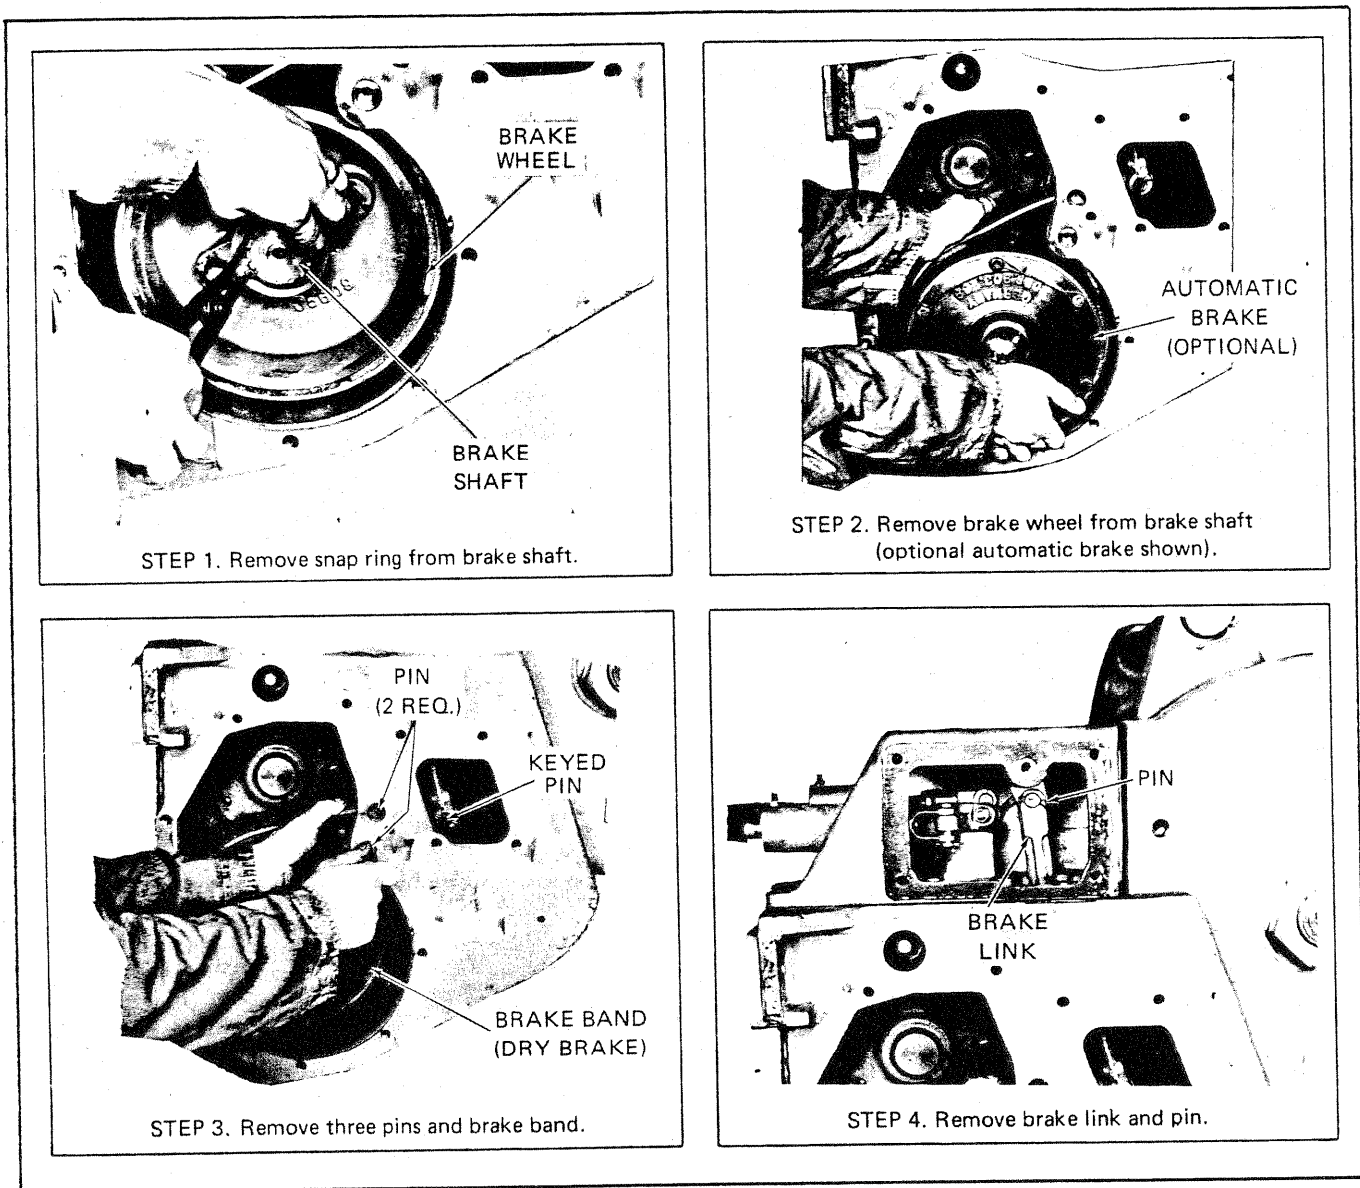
REMOVAL OF DRY BRAKE AND AUTOMATIC BRAKE, DIRECT DRIVE WINCH
